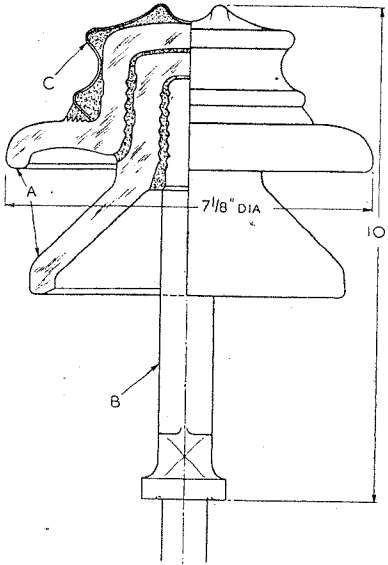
11-kV pin-type insulator with metal cap (Pilkington Bros.) A, toughened glass shells; B, steel pin; C, copper or aluminium cap.
